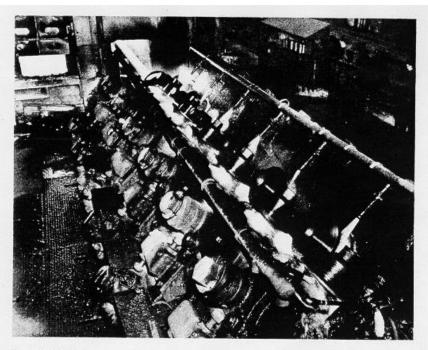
33. Over-all view of 12-stand stretch-reducing mill, with tube emerging from tube-reheating furnace in the background.
